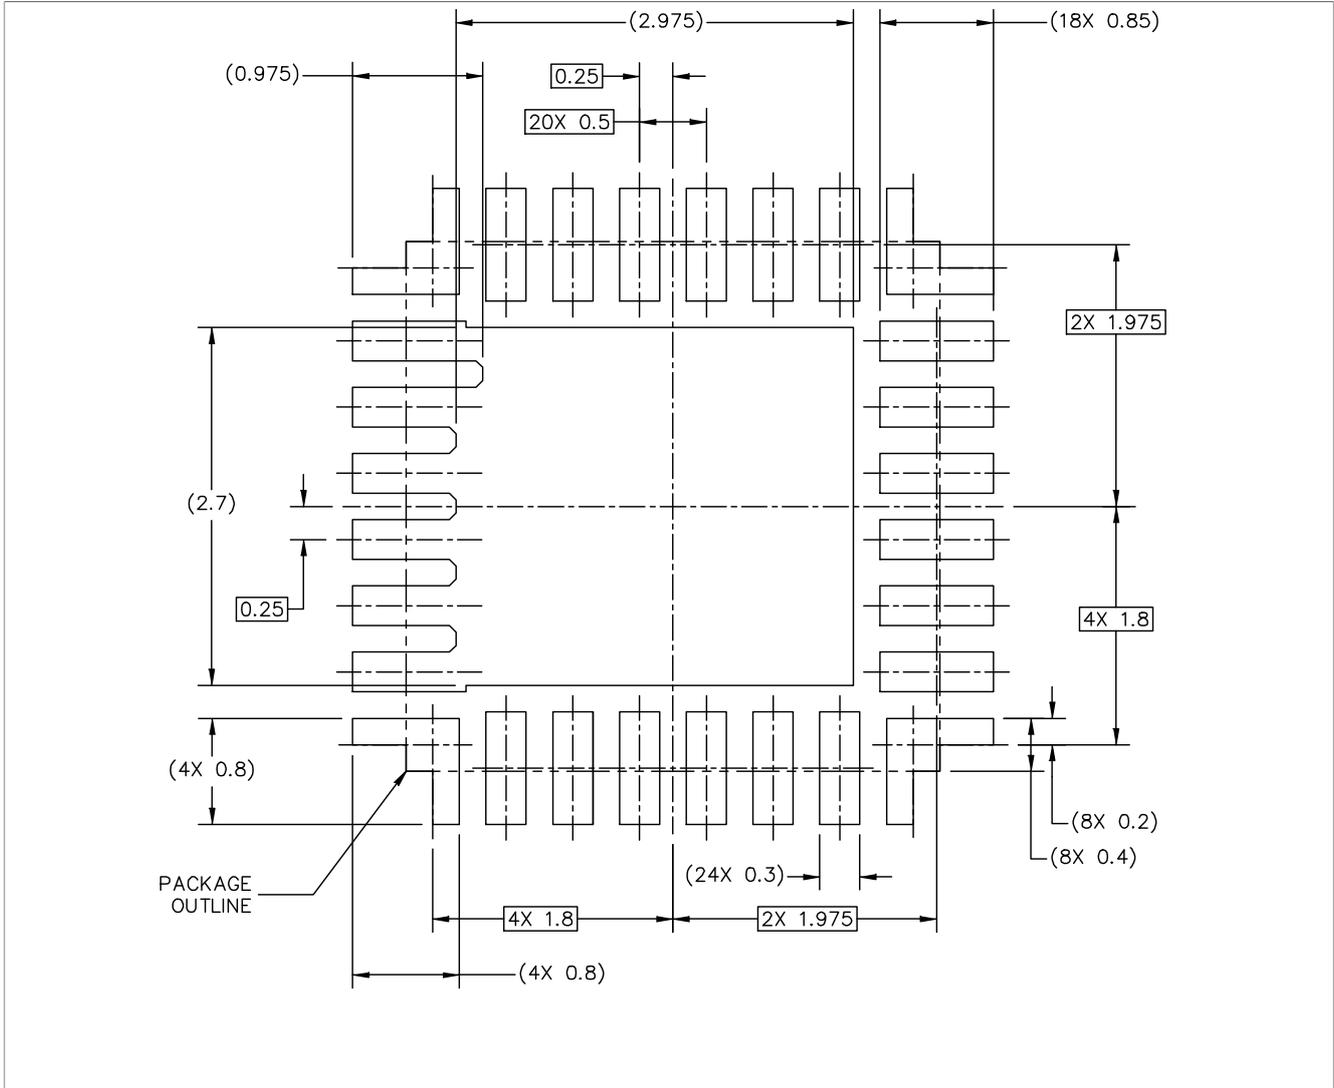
Reflow soldering footprint part1 for HQFN24 (SOT1931-1(D))
